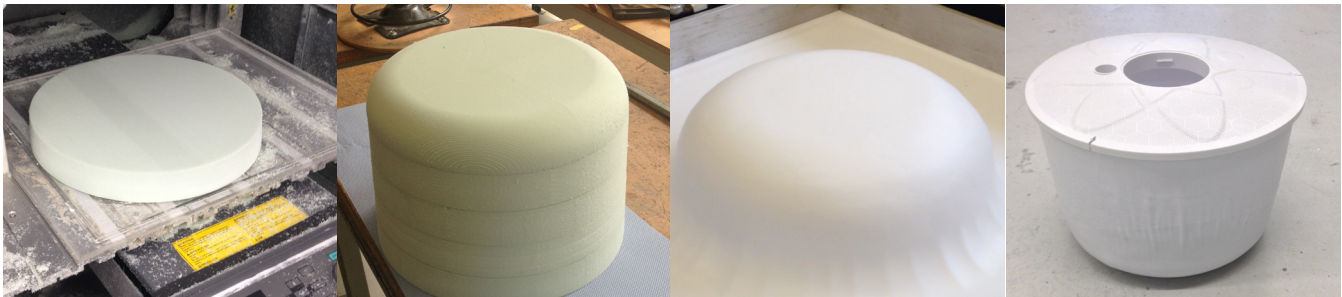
Production of vacuum formed parts. 1) CNC Milling of pattern. 2) Build up of layers for pattern. 3) vacuum forming of plastic over patter. 4) Base for Concept 4 with Suna-Trap canopy.
